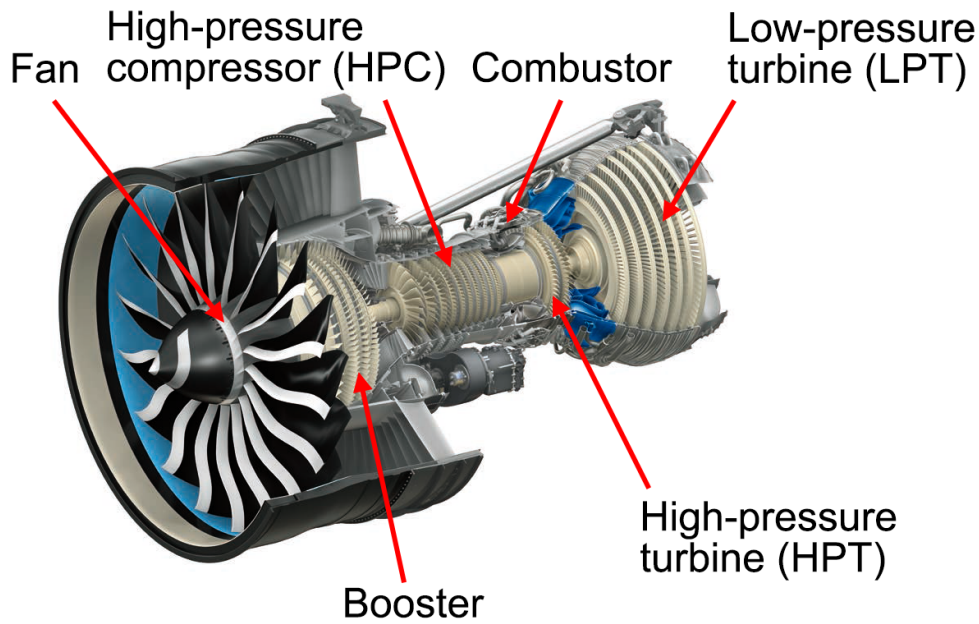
GE Enx-1B turbofan engine cross-section.
